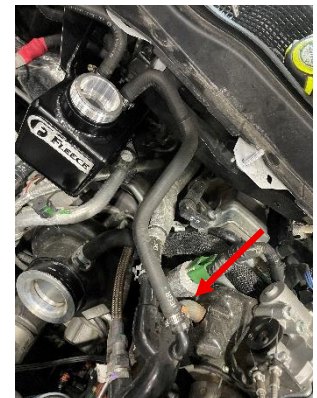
Installation of opposite end of coolant feed hose at standpipe. AC line retainer.
